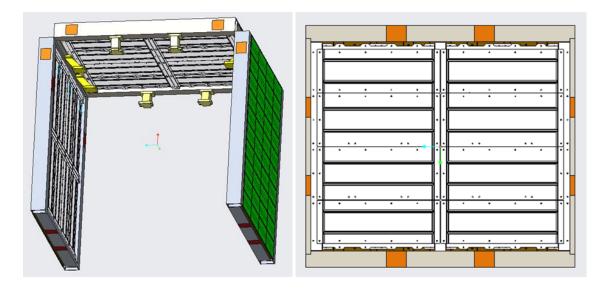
Antenna Panel Deployment Mechanism Assembly include XPAA Unit
